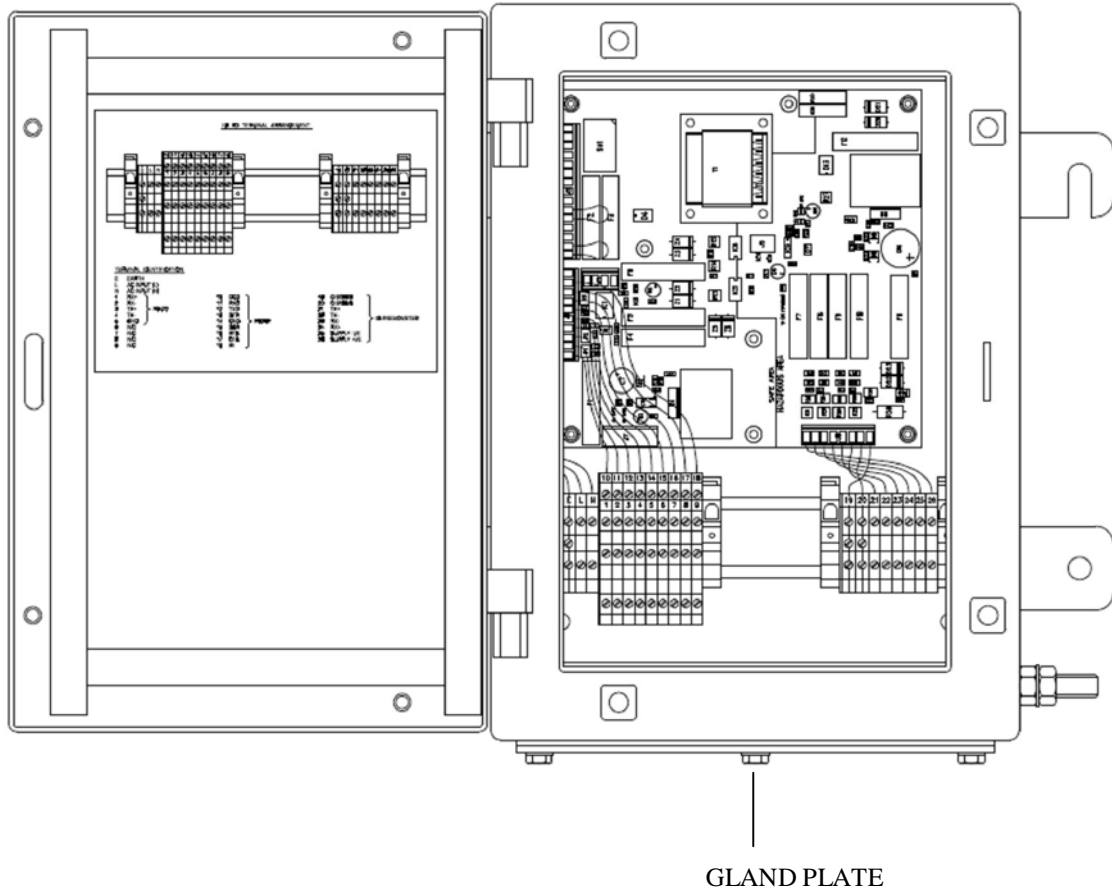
M-039 Issue 3, I.S. Terminal Arrangement
